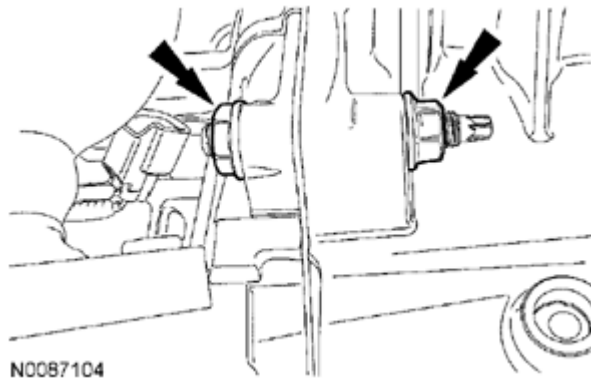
Locating Nuts And Transaxle-To-Engine Stud
